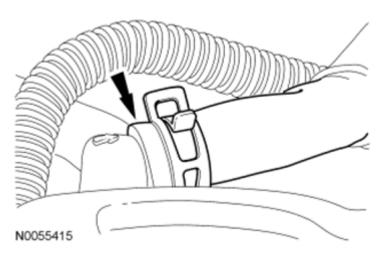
Locating Vacuum Hose Courtesy of FORD MOTOR CO.
